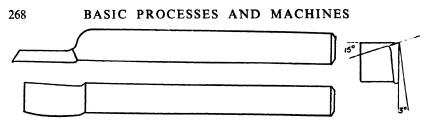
Cast-steel tool for turning faces of long-flanged pipe.
